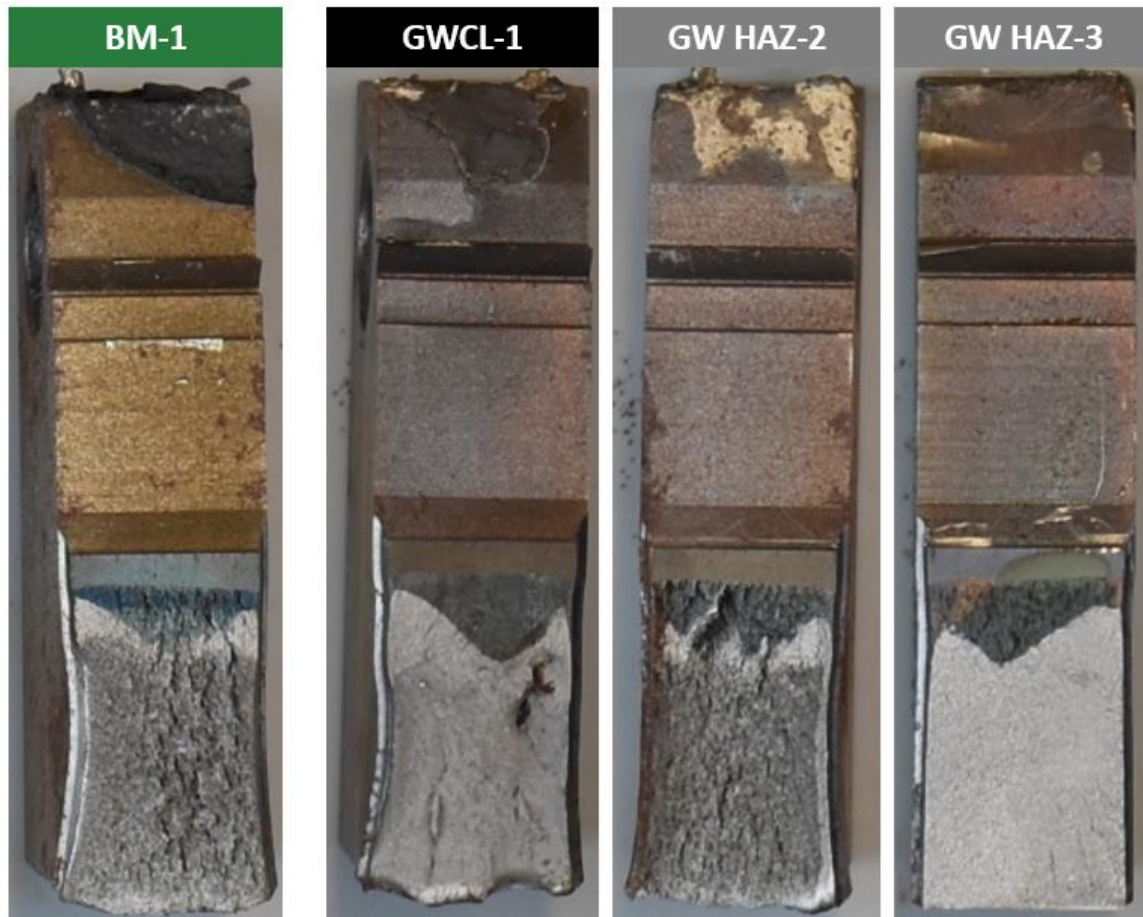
Post test fracture surfaces of base metal, GWHAZ and GWCL specimens from X46.
